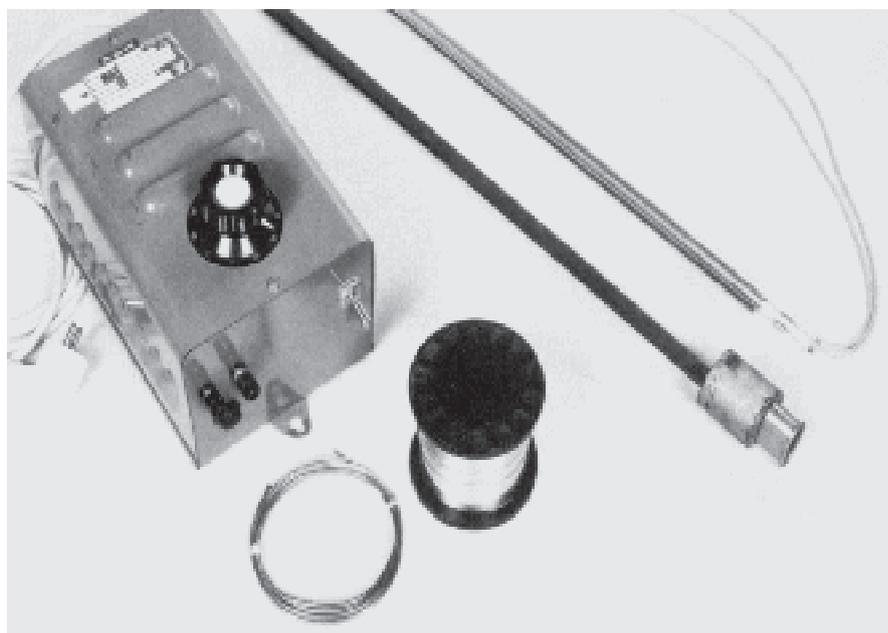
Heating wires with transformer, heating rod, and quartz tube for linear heating
